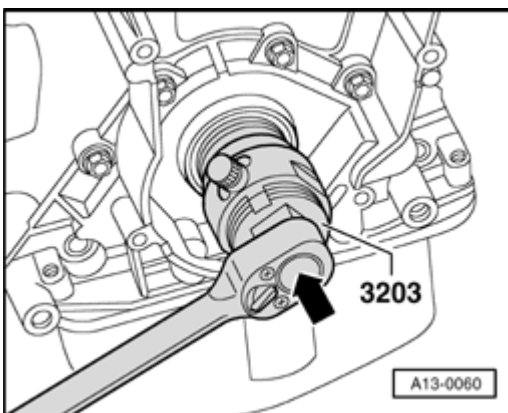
Loosening Knurled Screw And Turning Inner Part Against Crankshaft Until Oil Seal Is Pulled
